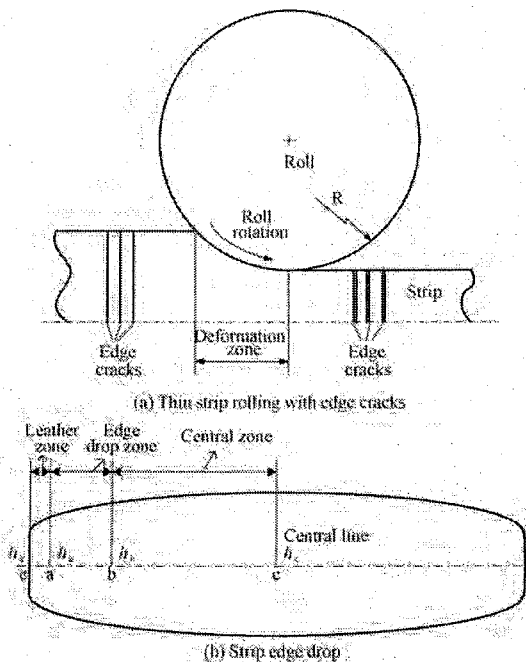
Thin strip rolling with edge cracks (a) and strip edge drop (b)
